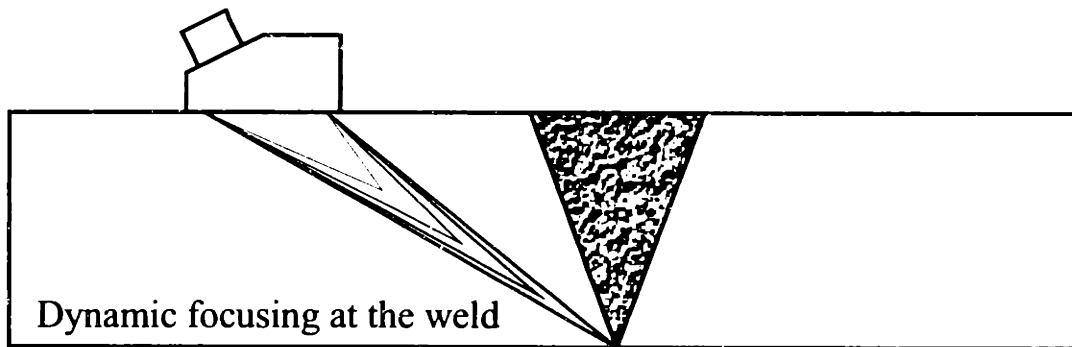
Detection of weld cracking using FATS dynamic focusing methods.
